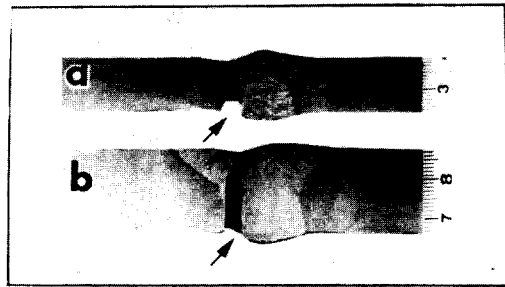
Fractured specimen after fatigue test; (a) heat input = 78 kJ/cm, (b) heat input = 132 kJ/cm
